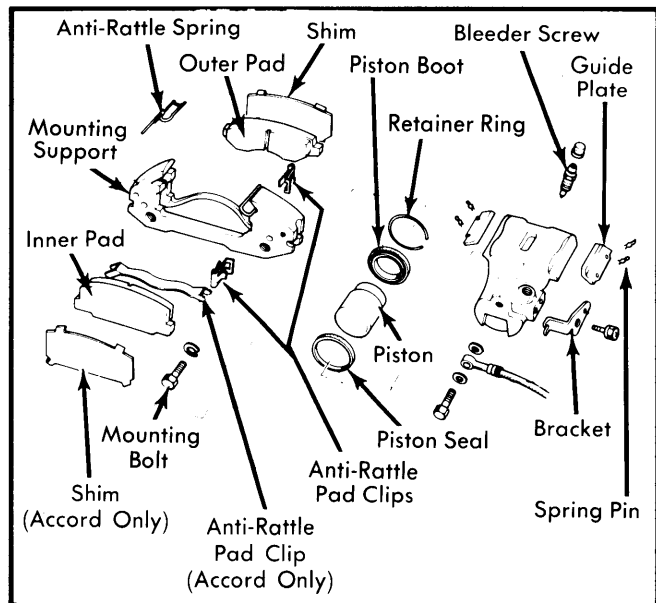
Exploded View of Front Disc Brake Caliper (Accord Shown - Civic Station Wagon Similar)
